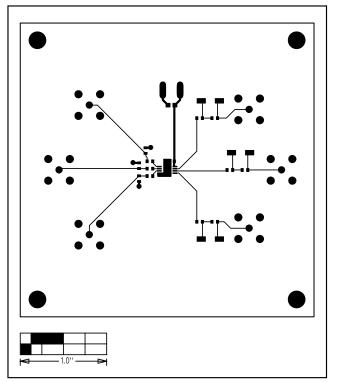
MAX9588 EV Kit PCB Layout—Component Side
